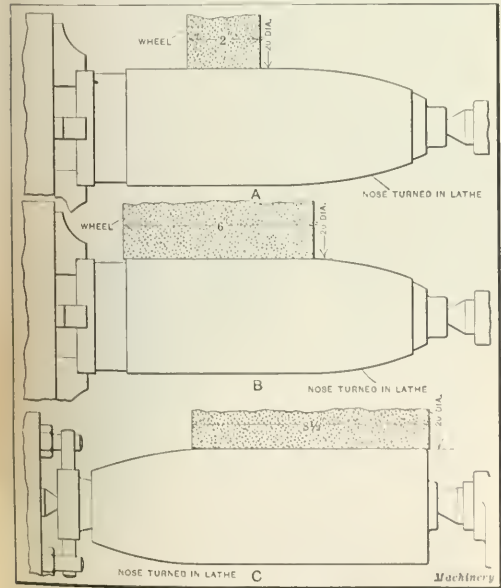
Diagram Illustrating Methods of finishing High-explosive Shell Bodies by turning and grinding
